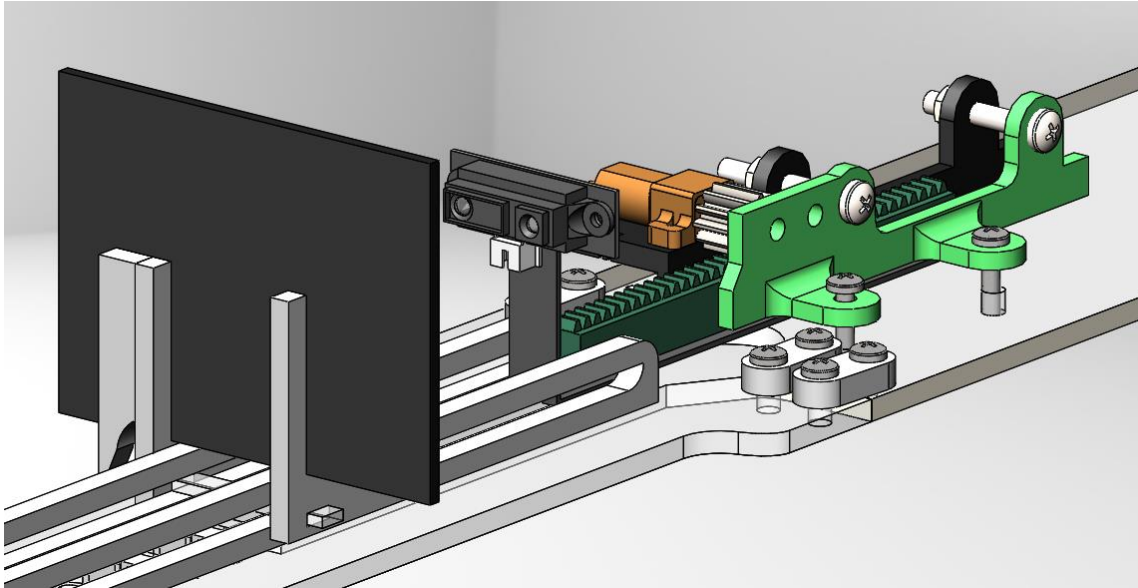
Solidworks CAD Model of Rack & Pinion Design
